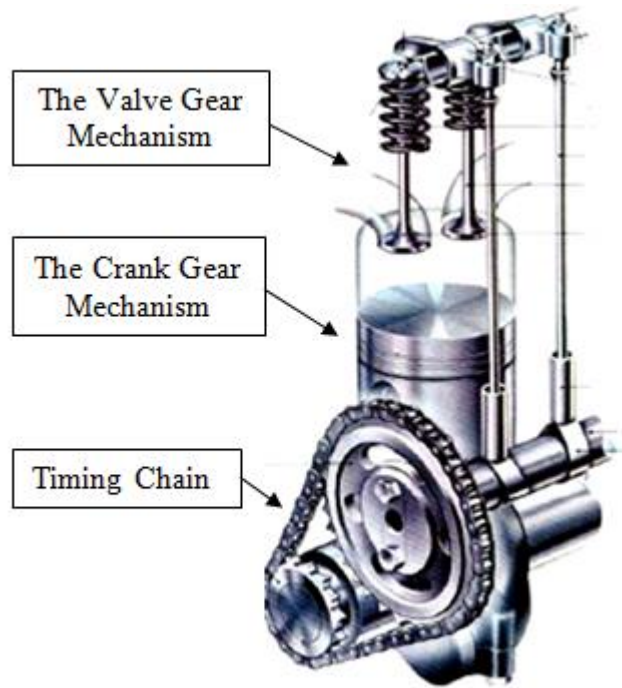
5: The Crank and Valve Gear Mechanisms[2]
